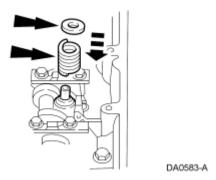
Installing Valve Stem Seals Courtesy of FORD MOTOR CO.
